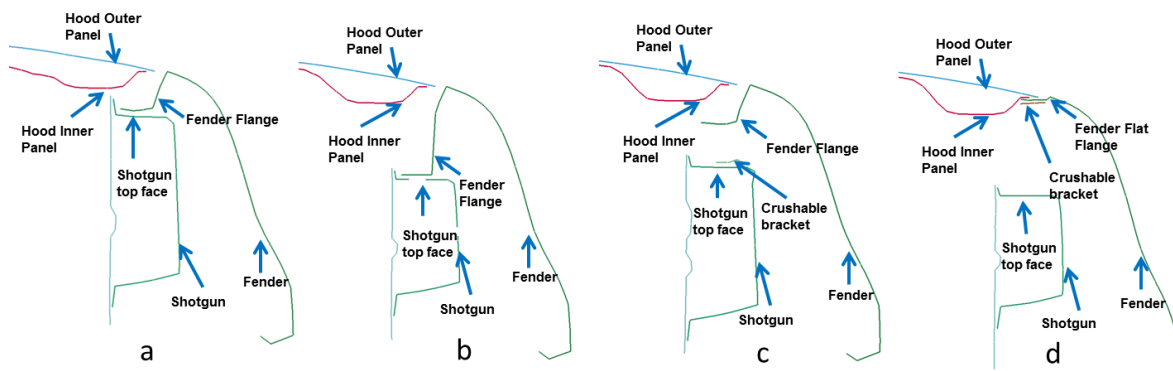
cross-sectional views showing the sectional cuts for the fender, hood panels and shotgun: a) original interface, b) fender flange lowered along with the shotgun, c) fender flange at original position with crushable bracket for fender to shotgun bolting, and d) flat flange for fender with crushable bracket for fender to shotgun bolting.
